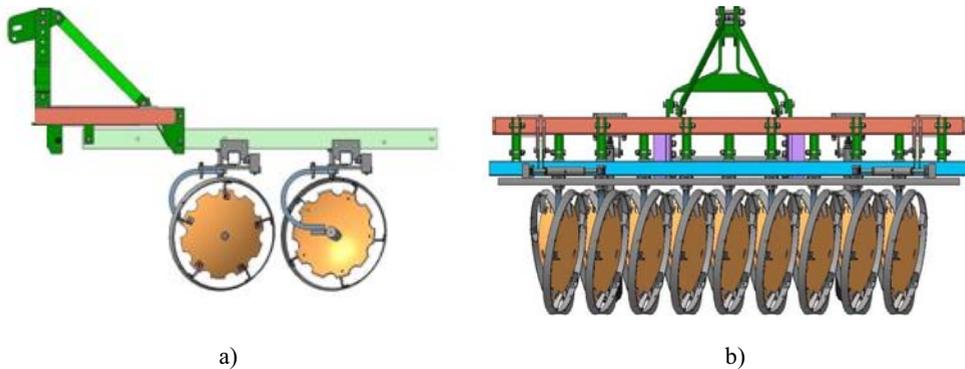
Structural diagram of a tillage tool with working elements in the form of rings (a - side view, b - rear view)
